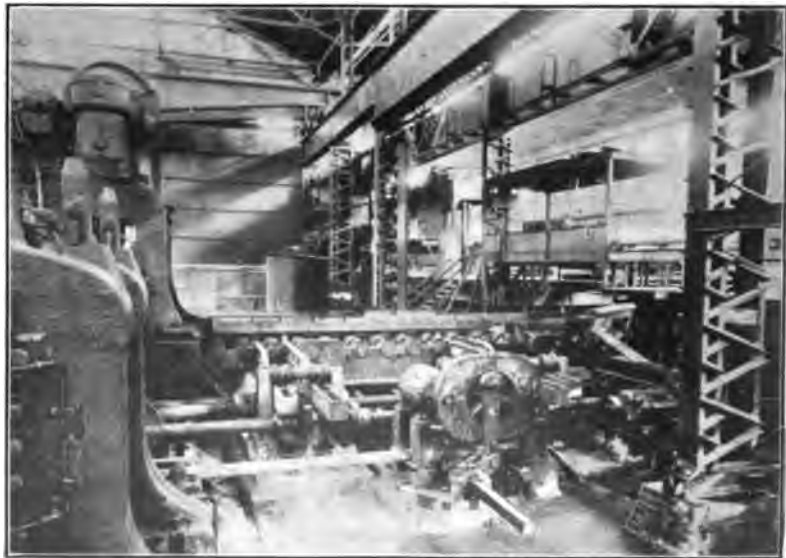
VIEW OF BLOOMING MILL WITH ELECTRICALLY OPERATED MANIPULATOR FINGERS AND SIDE GUARDS [WRIGHT]
